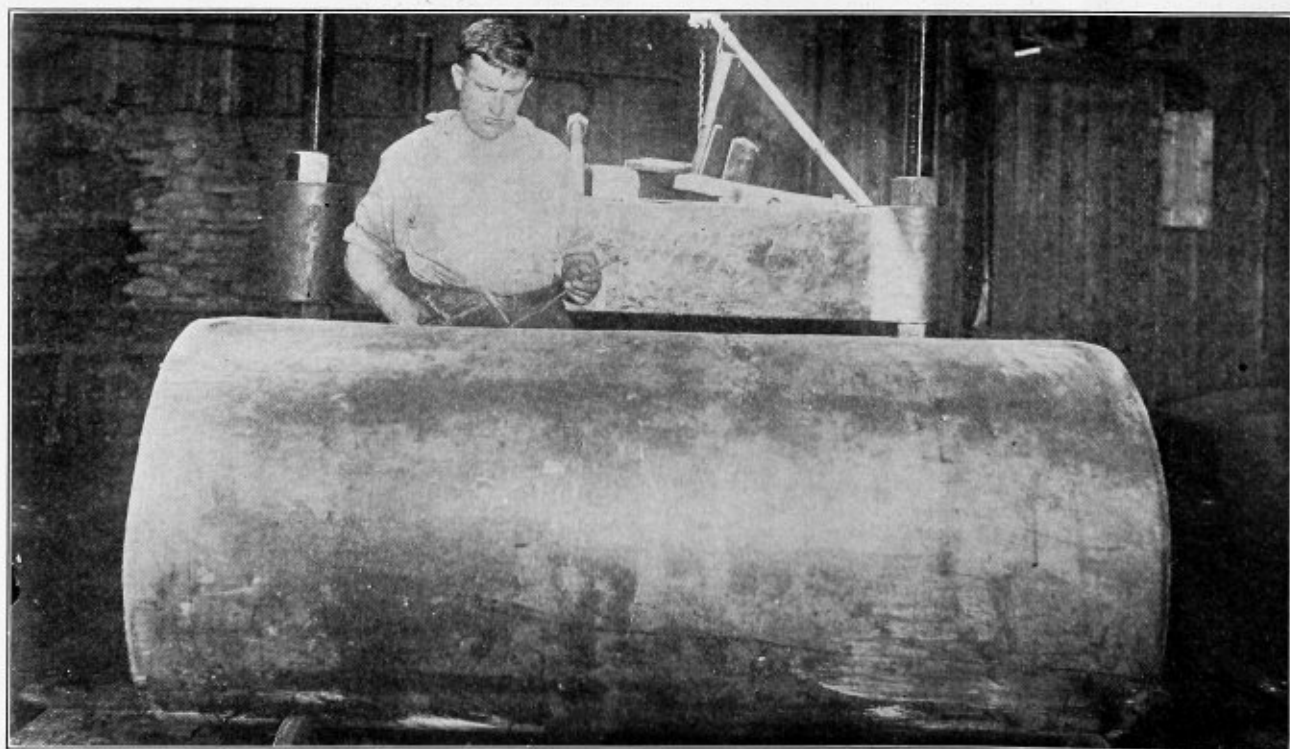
Welding the Longitudinal Seam in a Hydraulic Tank
